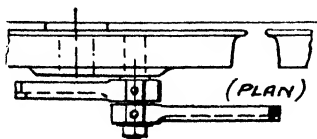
Arrangement of Coupling Rods to Avoid Joints.
